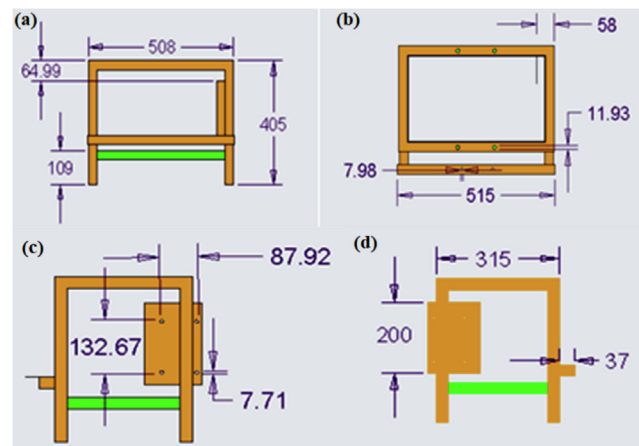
Initial dimension of machine tool structure of cutting force measuring machine.
